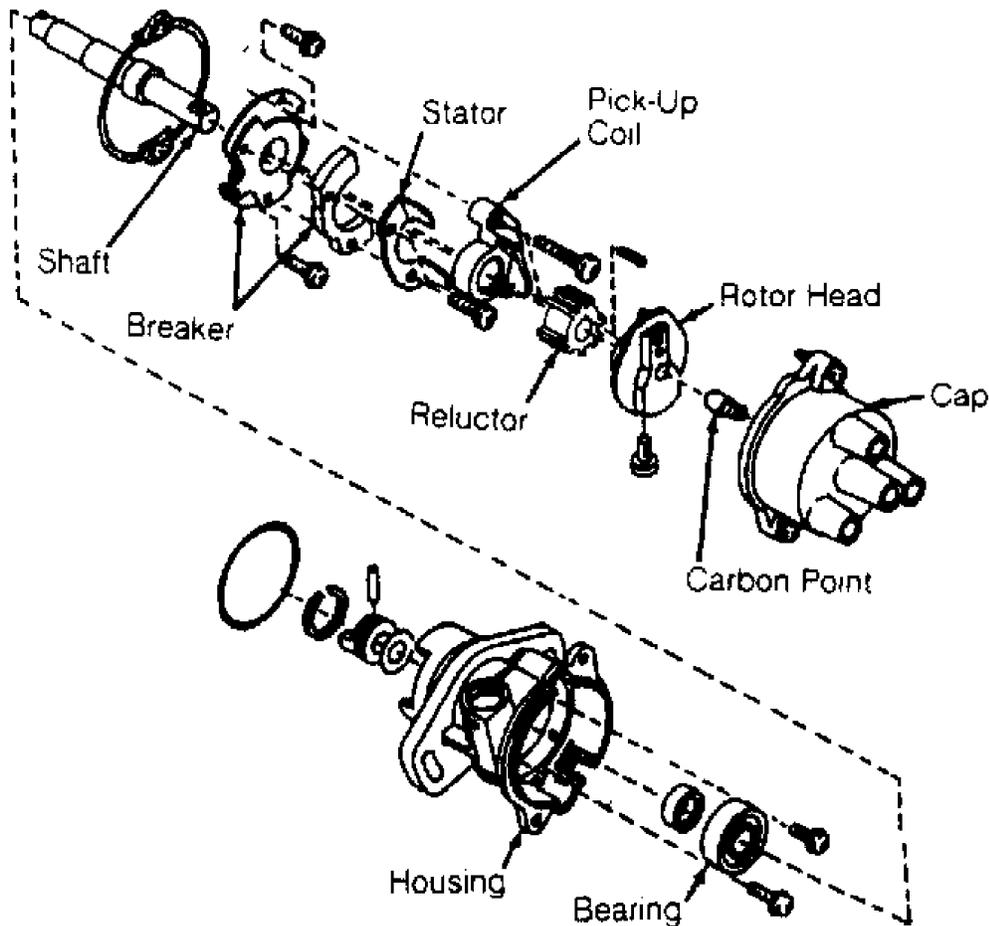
Exploded View Of Distributor (Justy 1.2L Carbureted)
